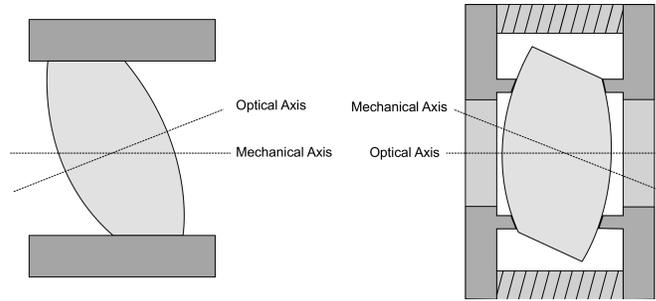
An illustration of the benefits of using surface mounting (right) over edge mounting (left). If a lens is mounted using its edge as a reference surface, while the mechanical axis of the lens will be aligned with that of the tube, the optical axis of the lens will not, and it is this axis which is relevant to the optical performance. When surface mounting is used, we expect the optical axis will be correctly aligned to first-order. We have adopted surface mounting for the lenses in the laser beam compressor.
